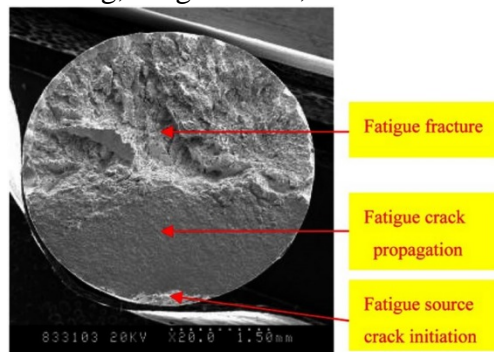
Scanning Electron Microscopy image of fatigue fracture
